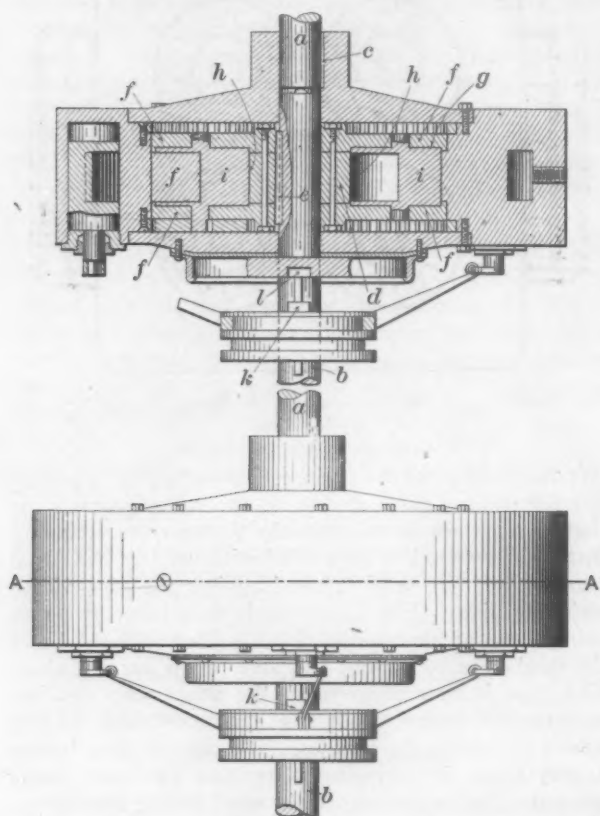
Axial Section on the Line B-B of Fig. 2 and Exterior of the Hydraulic Clutch Drive.
